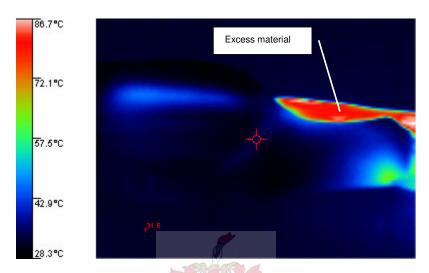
Bottle from RPD mould produced at 16s, with 39g product mass.
